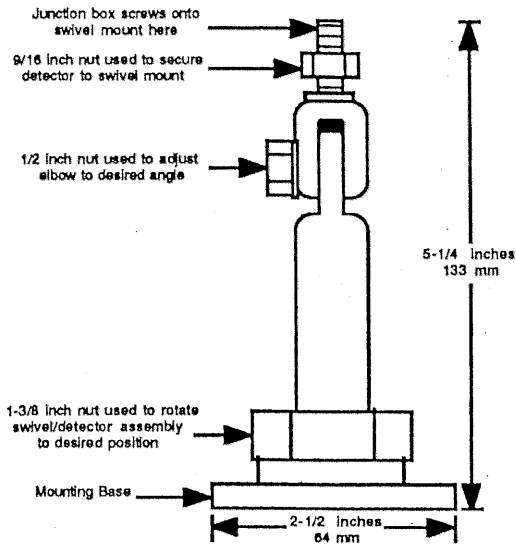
Q9001J Swivel Mounting Bracket (replaces Q9001E)
